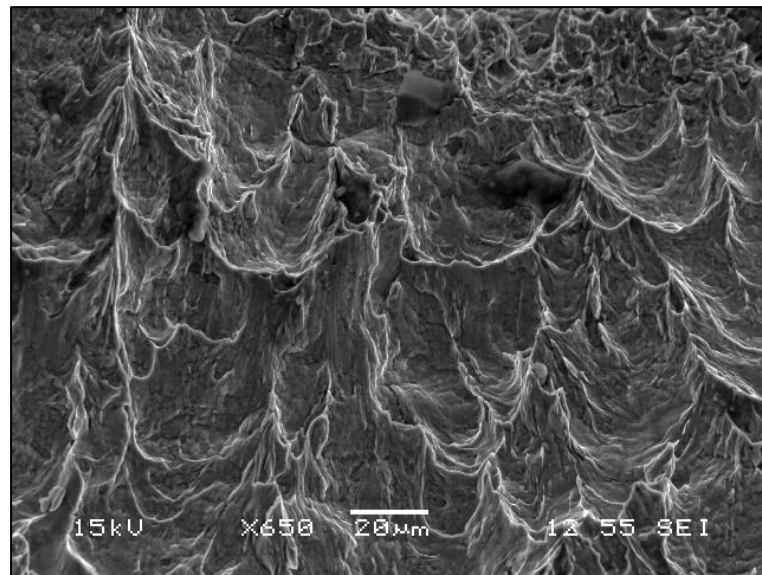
Charpy impact surface of mechanically formed specimen
